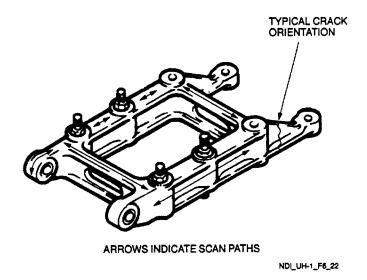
Support Assembly, Hydraulic Cylinder Assembly (Starboard).
